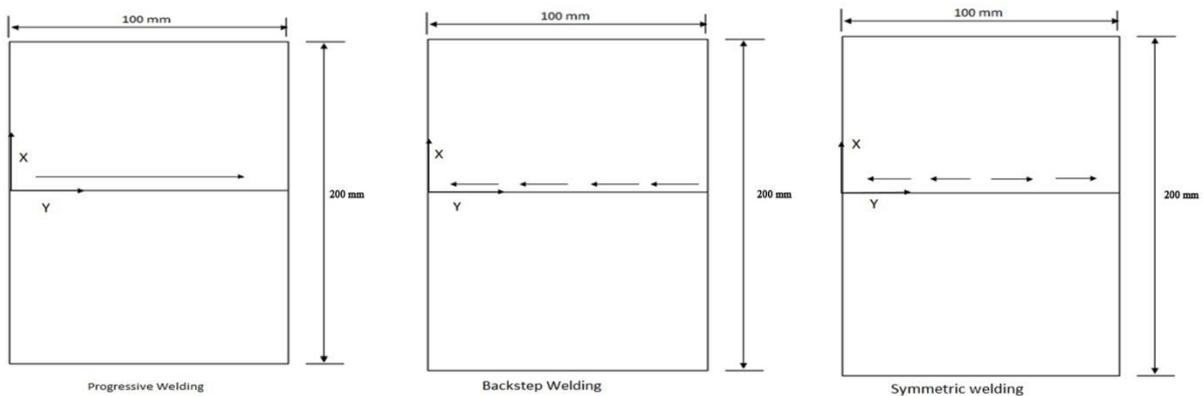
The different welding sequence for butt welds.(Progressive , Back-step and Symmetric Welding
